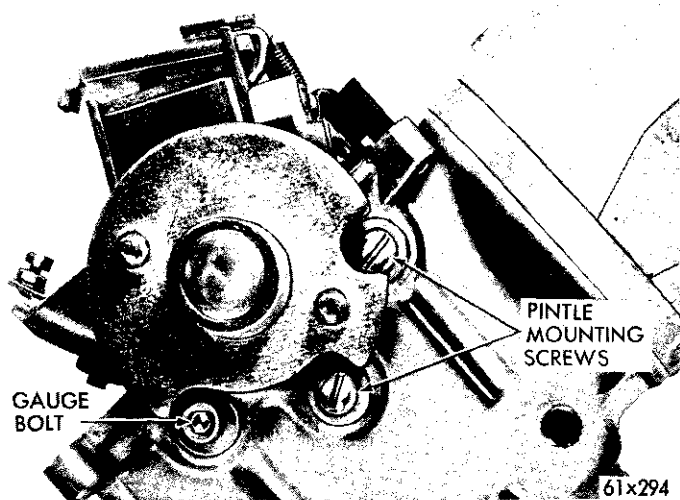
Remove Two Pintle Screws and Washers and Gauge Bolt
